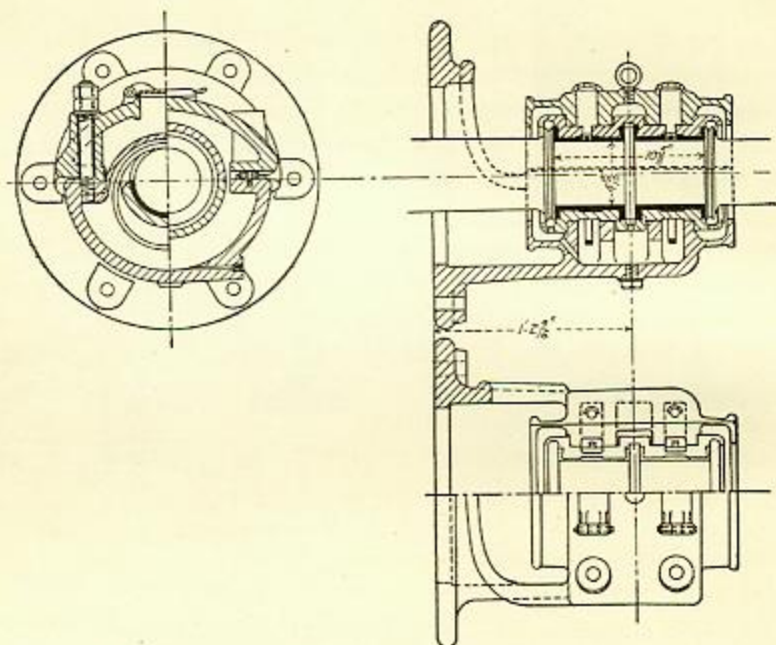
Double Oil Ring-bearing for Horizontal Shafts.
